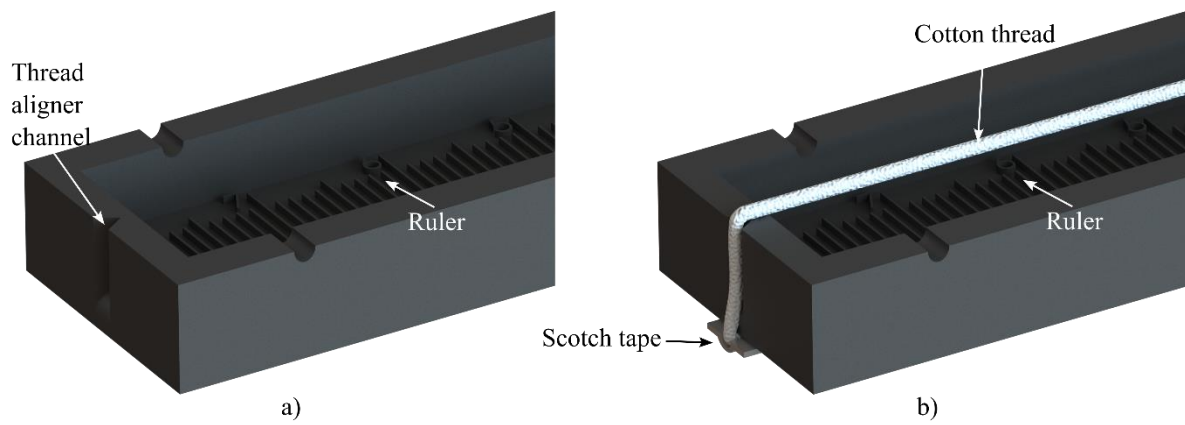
Left end-side of proposed platform including thread aligner channel and illustrating a) platform with thread aligner channel and 3D printed ruler and b) platform with cotton thread assembled into platform.
